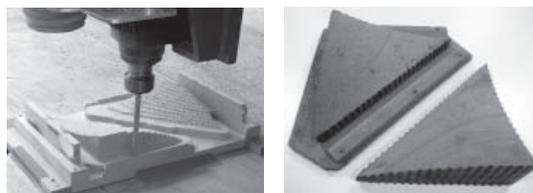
(a) CNC milling of the moulds; (b) Moulds for Vacuum-forming.
